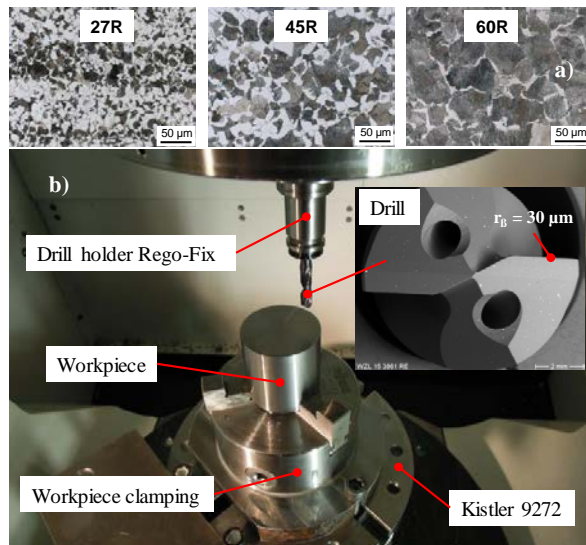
(a) FP-Steels microstructure; (b) Drilling test setup.
